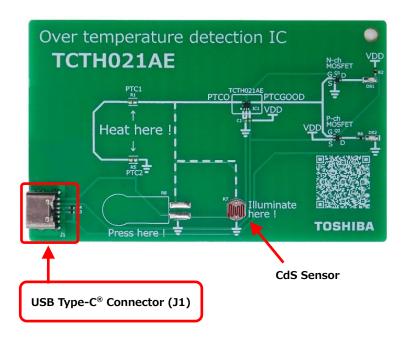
PCB Front View (Light Detection Circuit Example)
